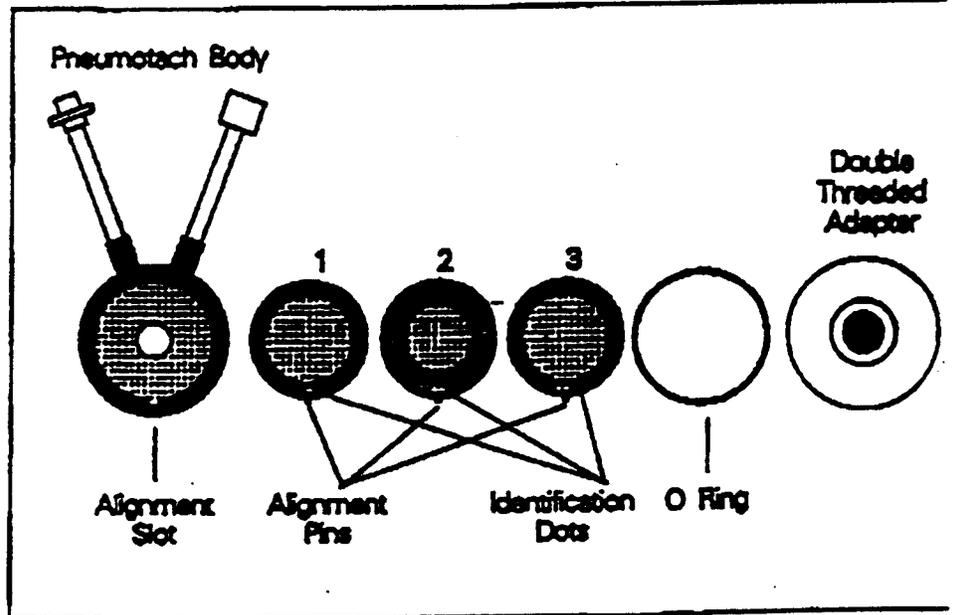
Exploded view of 30 LPM Pneumotach.
